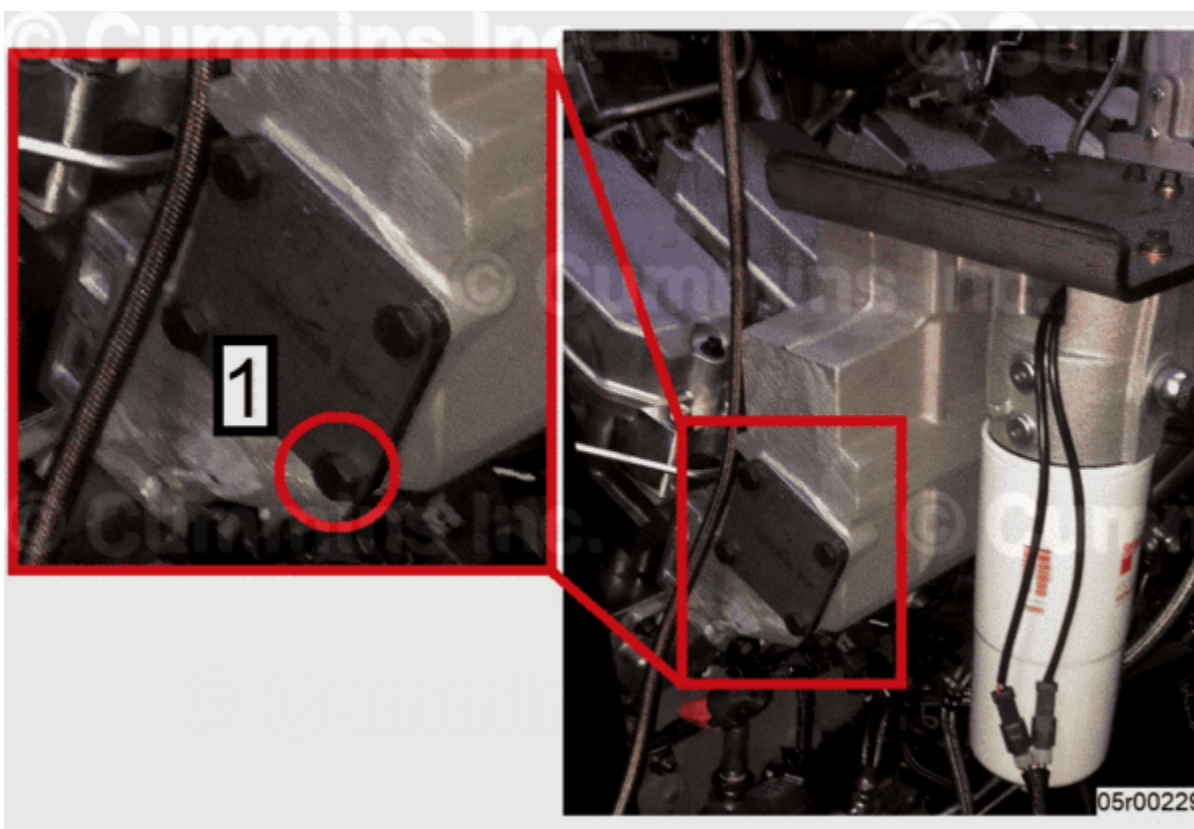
, Capscrew Installed in Intake Manifold Cover Plate.
